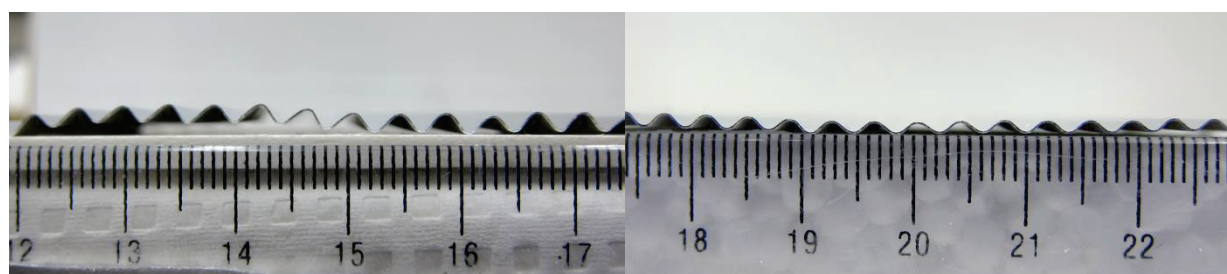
A two-layer sheet consisting of aluminized Mylar adhered to aluminum foil tape is shaped using the same 7-mm pitch grooved aluminum block as a die. This two-layer system readily conforms to the shape of the grooved mold, but substantial scratches can be seen on the delicate bare metal side of the film.
